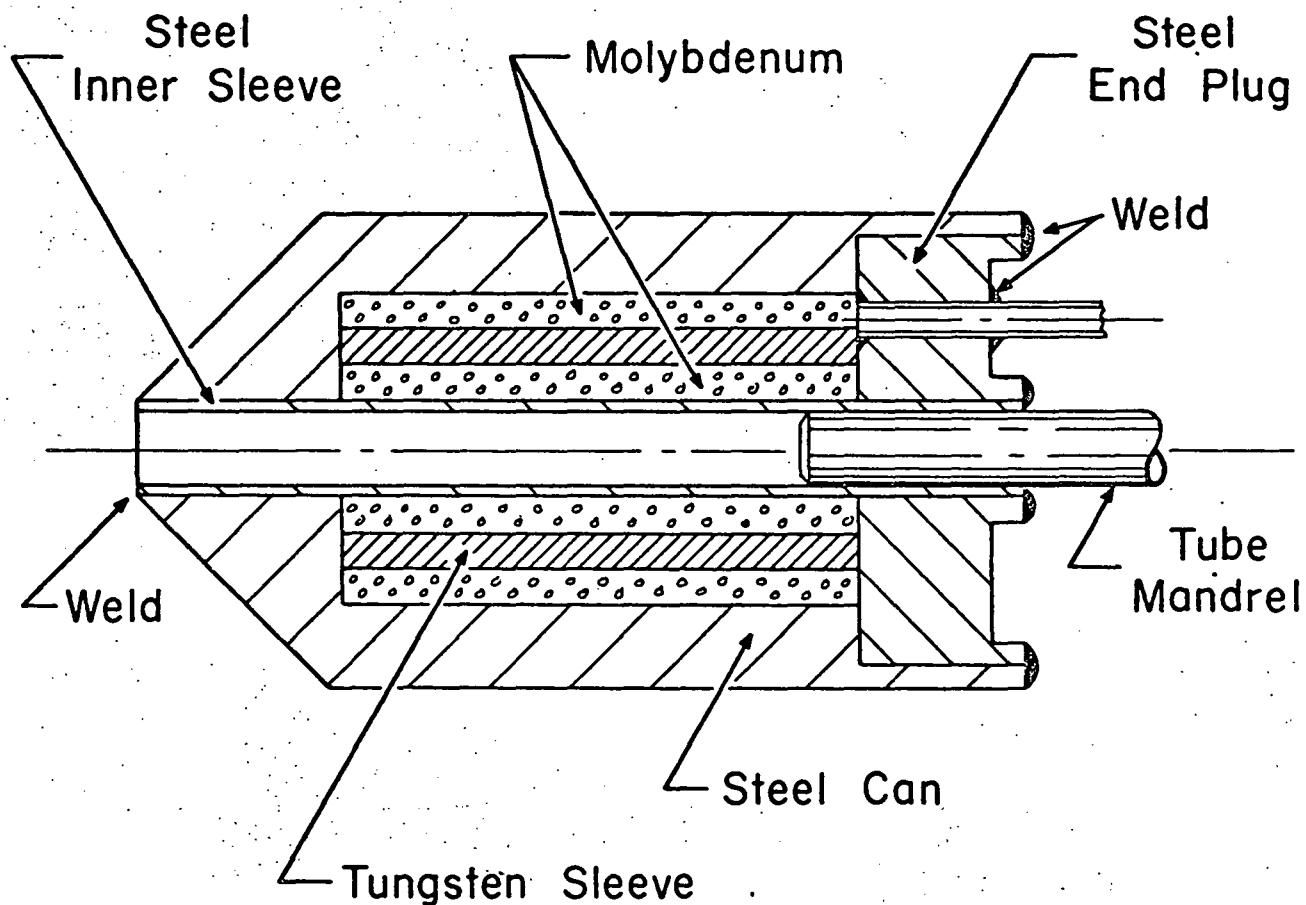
Billet for 2200°F Extrusion of Large Tungsten Tubes
